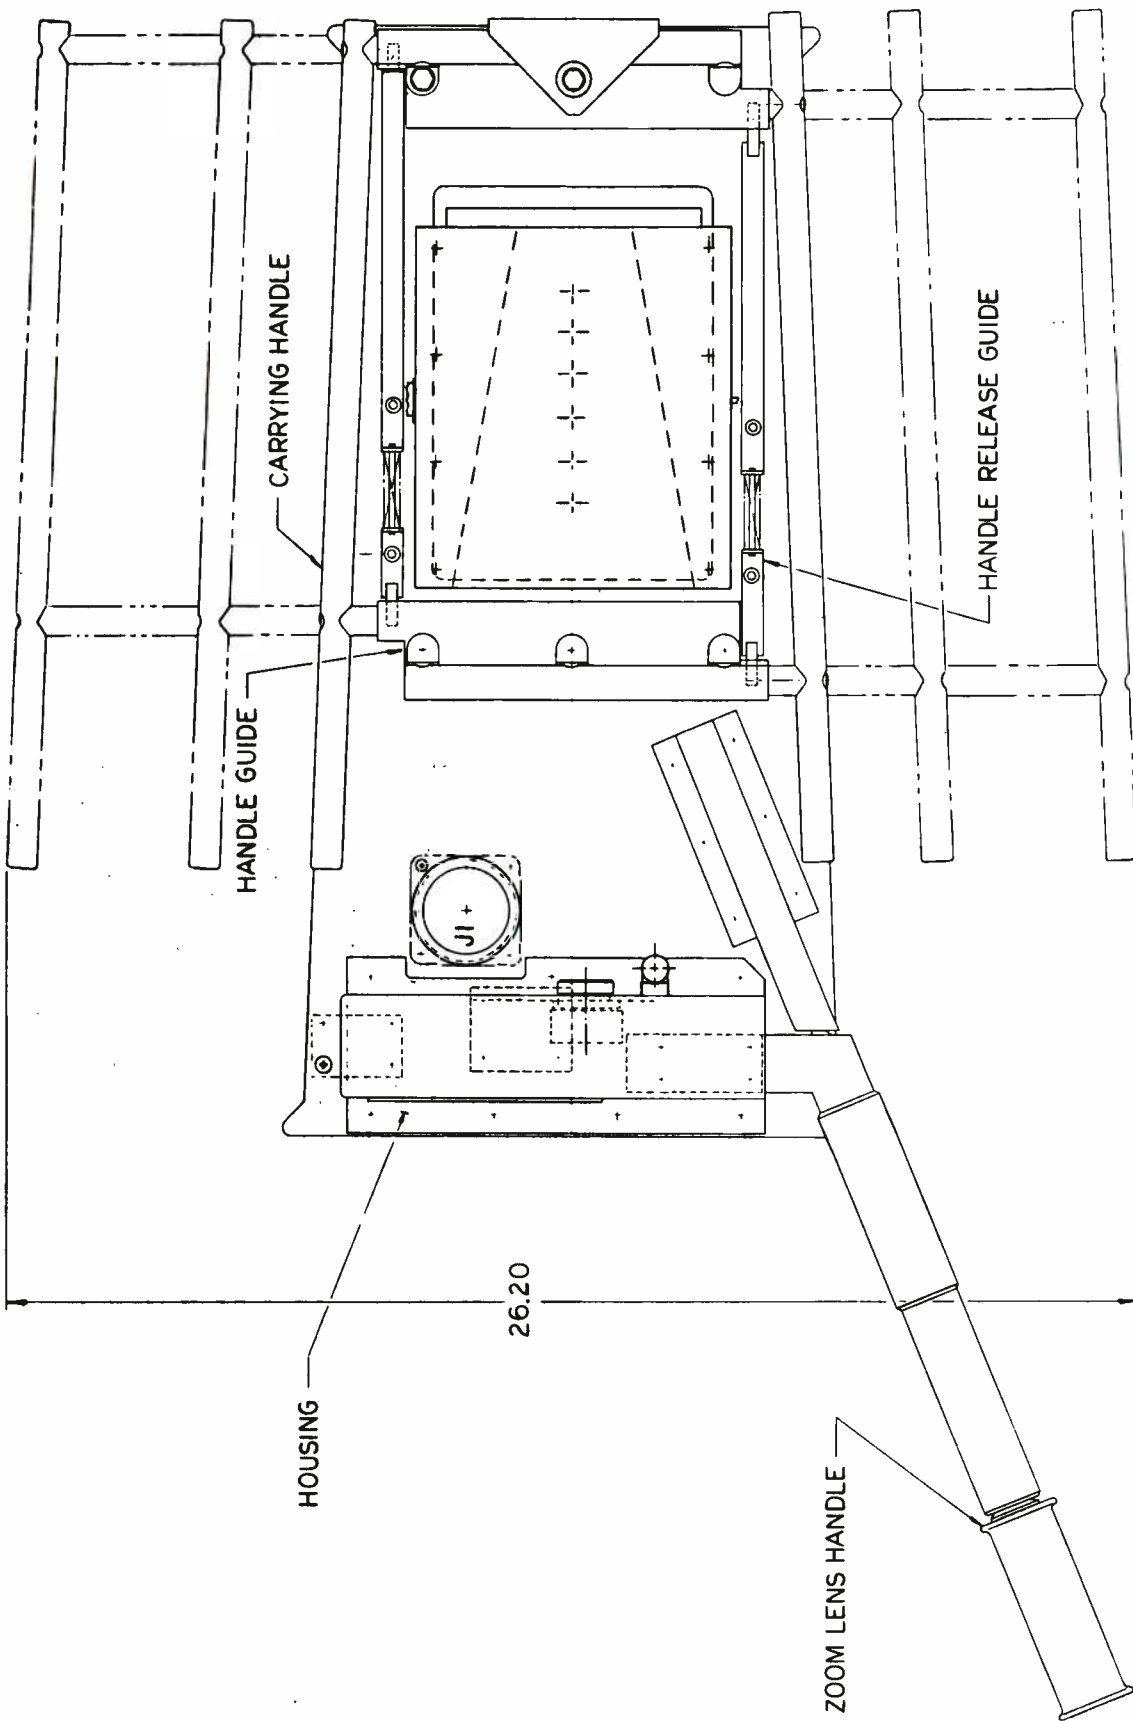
Reduced Image Optical Assembly Diagram (D-7674522, Sheet 3, Rev. A)
